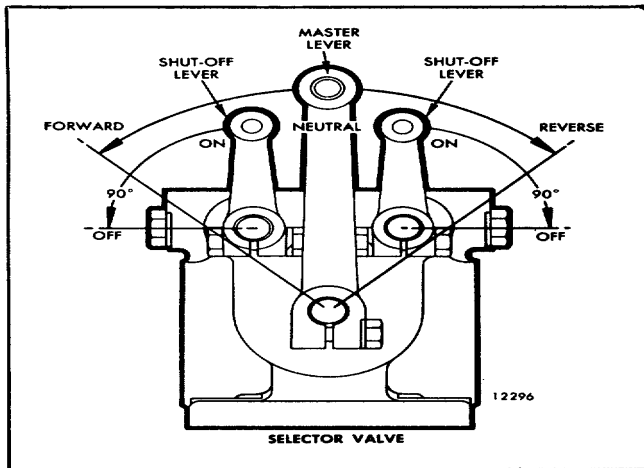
Lever Arrangement on Tandem Twin Engine Marine Gear Selector Valve
